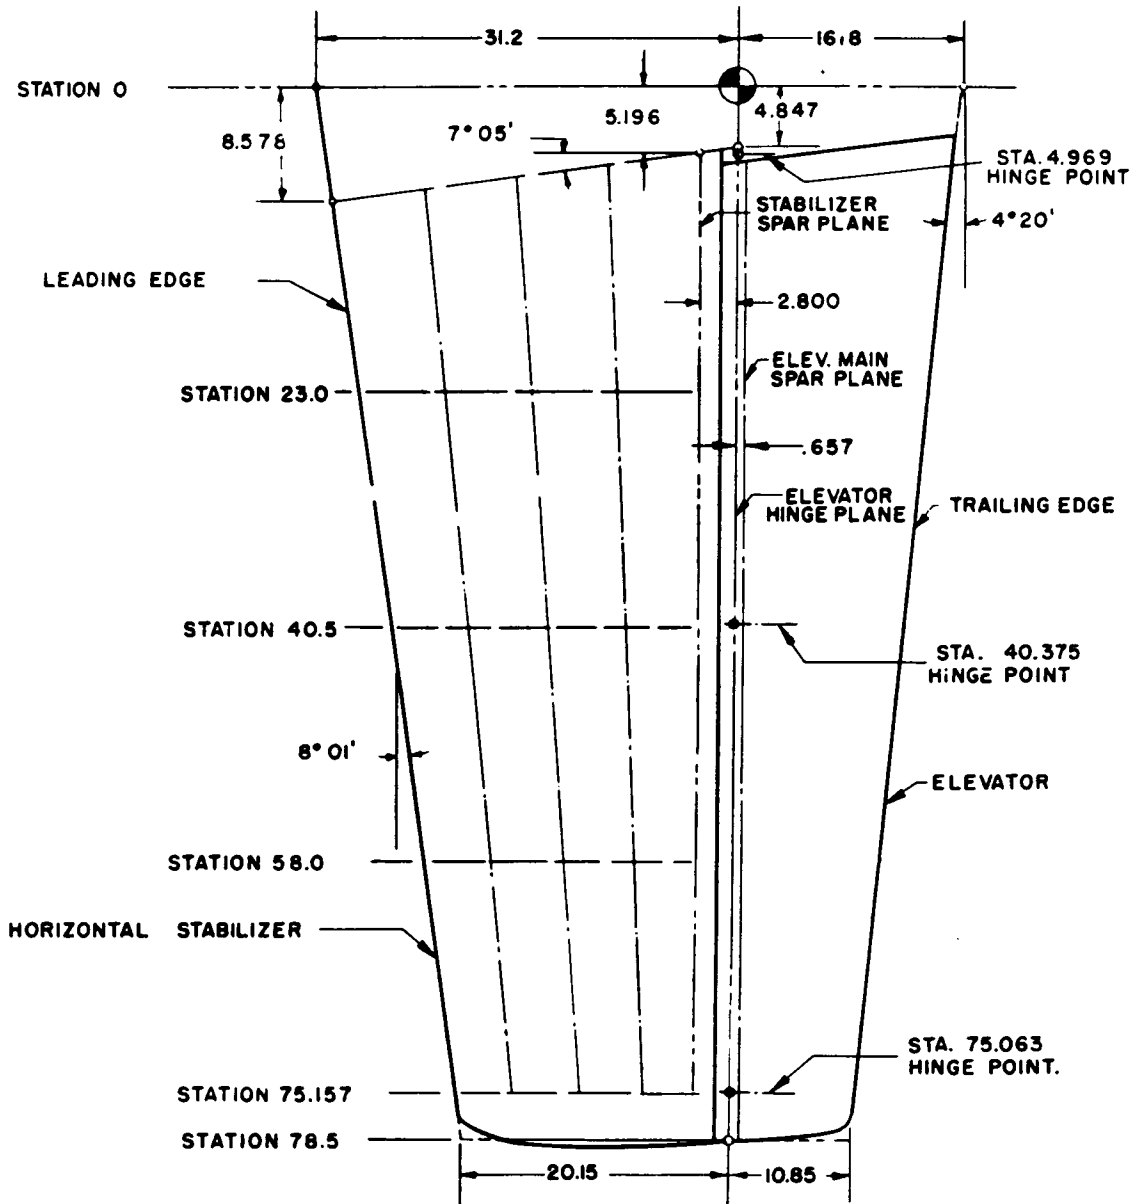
HORIZONTAL TAIL JIG DIMENSIONS
